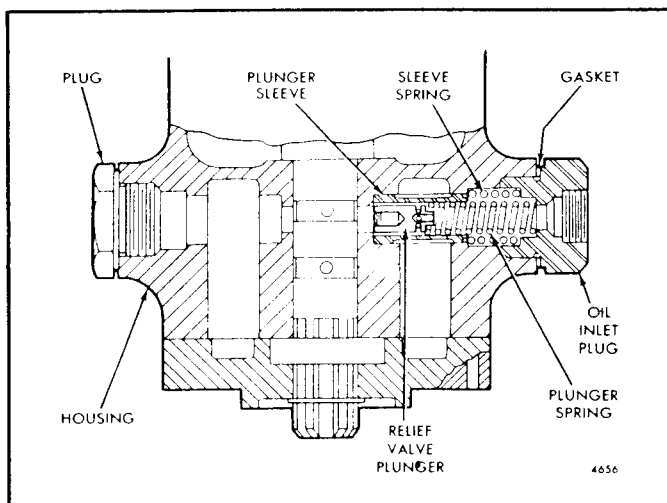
Location of Oil Relief Valve Plunger, Plunger Sleeve, Springs, Oil Inlet Plug and Dummy Plug in Governor Housing (R.H. Governor Shown)
